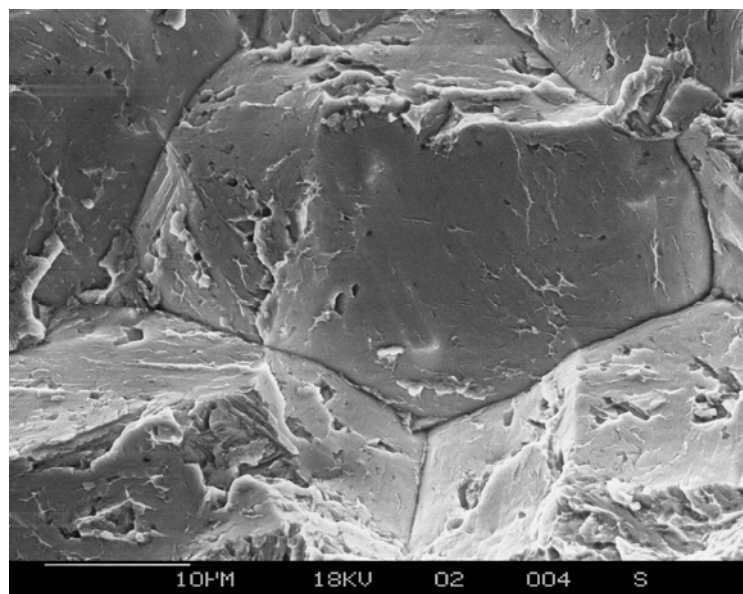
Fracture surface for un-plated 300M specimens.
